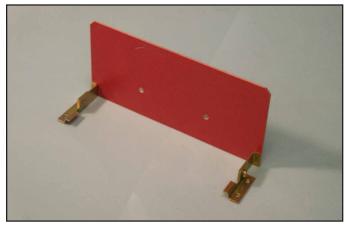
Mounting Brackets and Trip Unit Support Clips Mounted to the Insulation Barrier.
